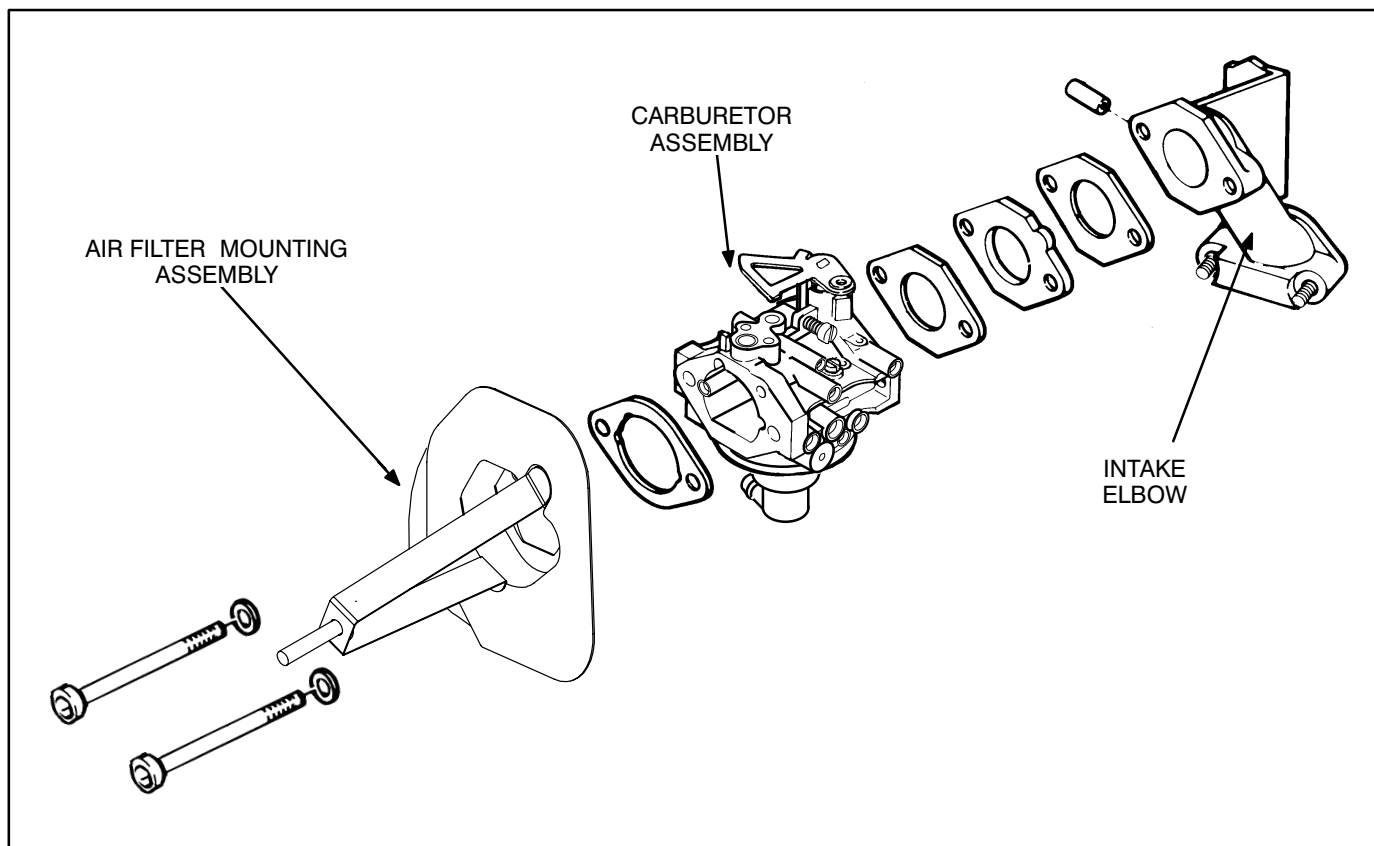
CARBURETOR AND INTAKE MANIFOLD ASSEMBLY
